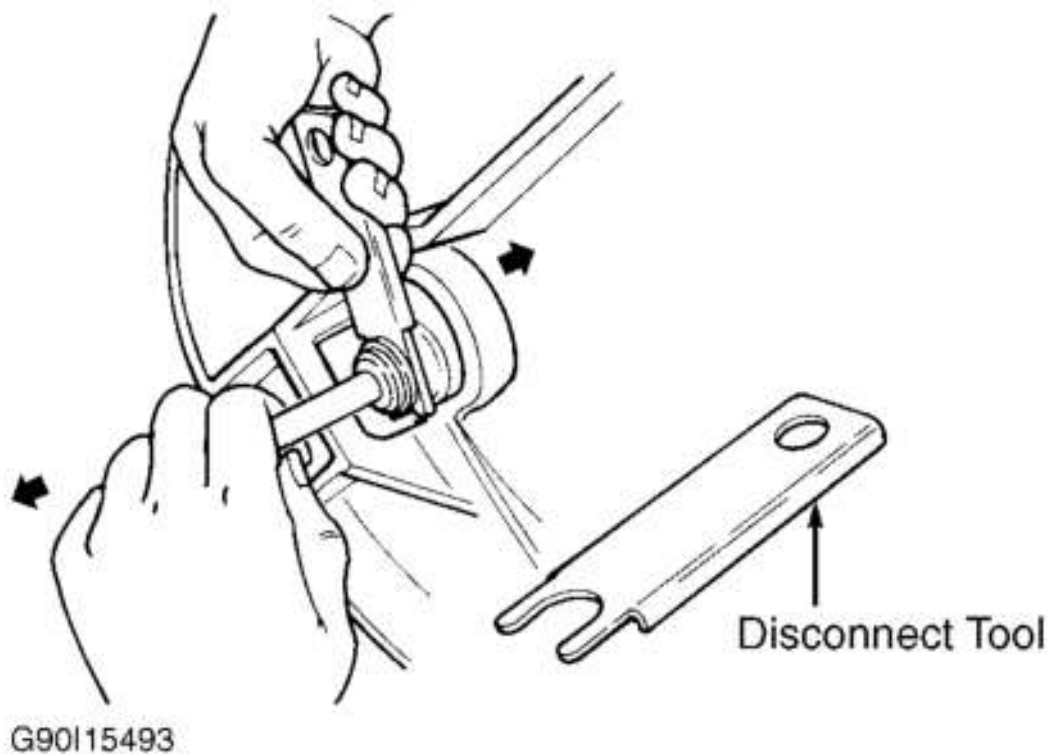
Removing Clutch Hydraulic Line (Internally Mounted Slave Cylinder)
